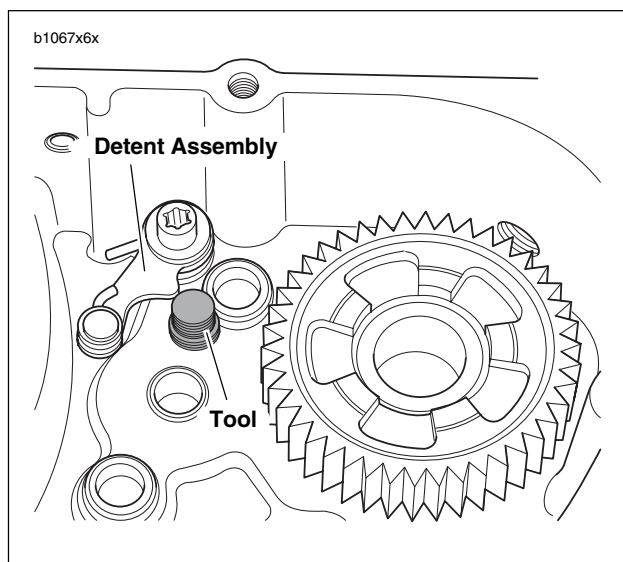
Gear Detent Assembly Aid (Part No. B-45520)
